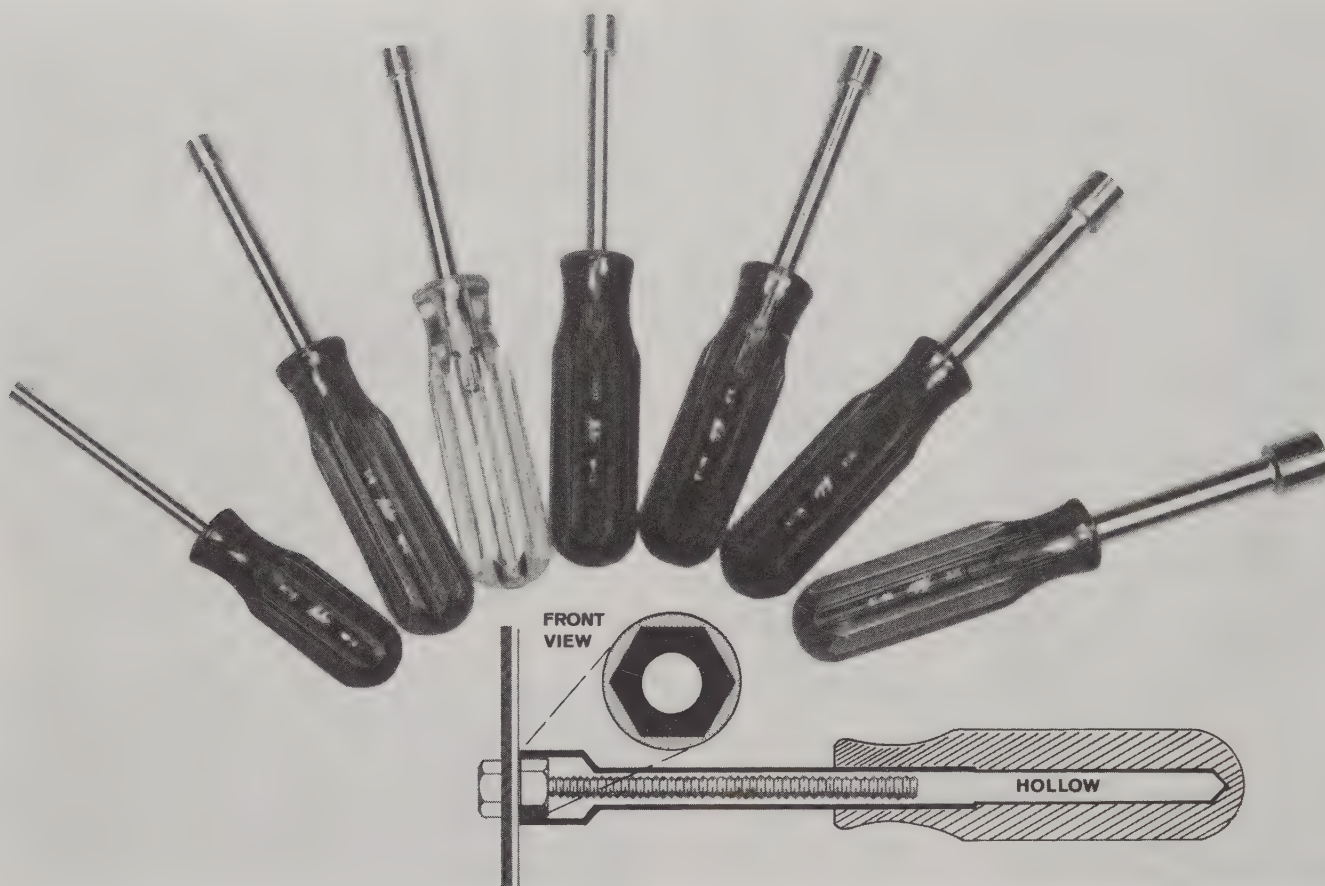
Nut drivers like these hollow-shaft types usually have handles that are color-coded for easy identification. (Malco Products, Inc.)
